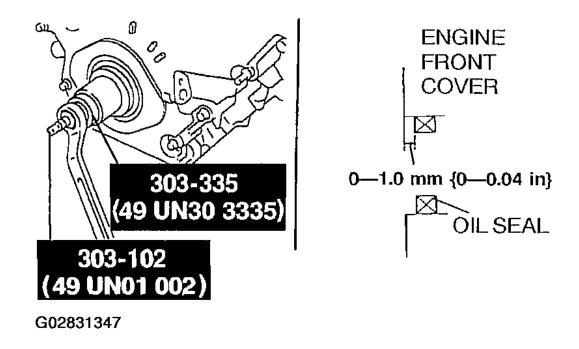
Installing Oil Seal Courtesy of MAZDA MOTORS CORP.
